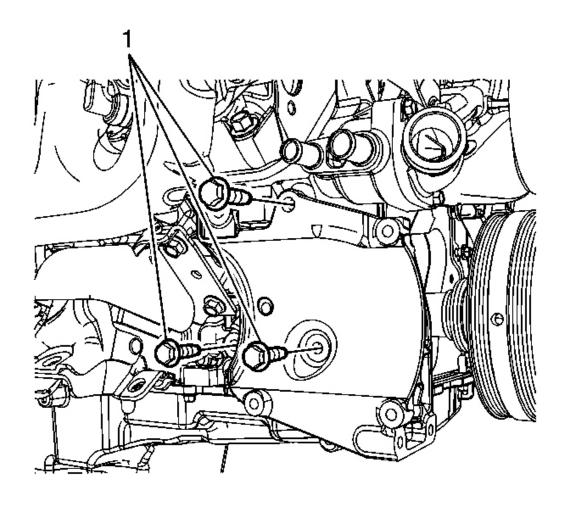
Engine Mount Replacement - Right Side Courtesy of GENERAL MOTORS CORP.
